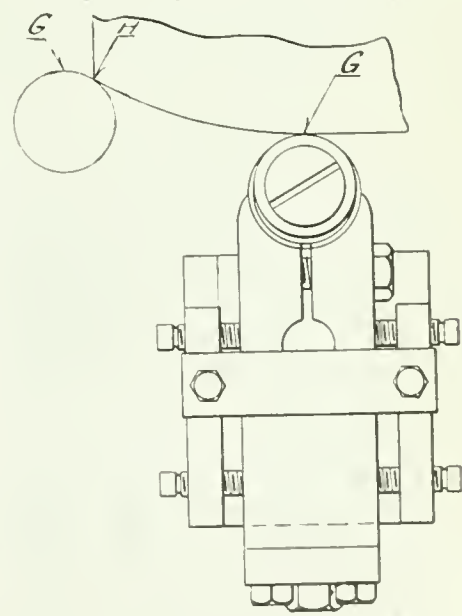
SPECIAL CIRCULAR TURNING TOOL.
